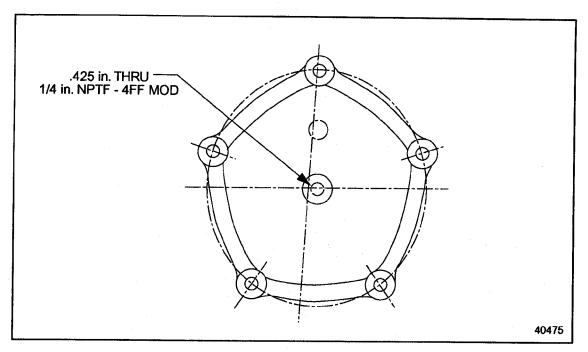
Drilled and Tapped Vent Line Hole in Front Camshaft Cover
